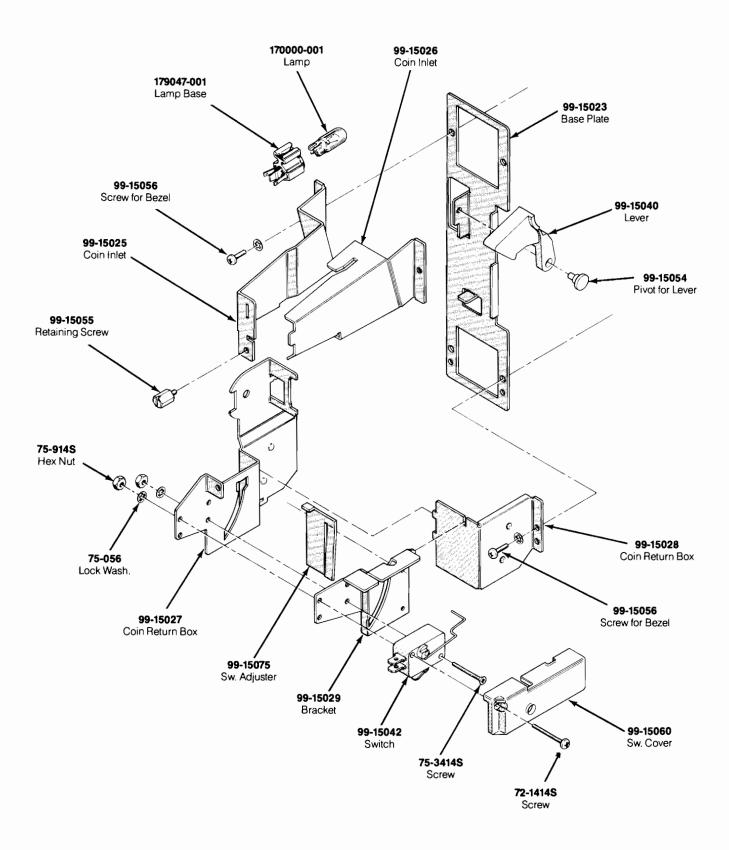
Coin Controls, Inc. Coin Door Assembly 171034-xxx A
